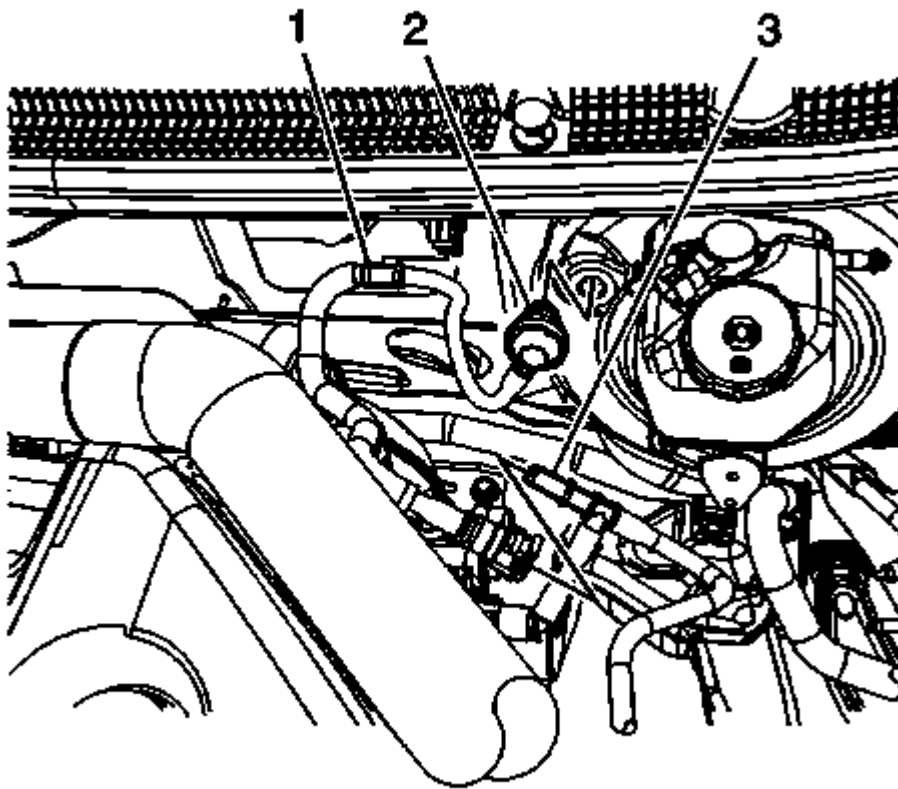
Power Brake Booster Vacuum Rear Pipe Vacuum Check Valve
